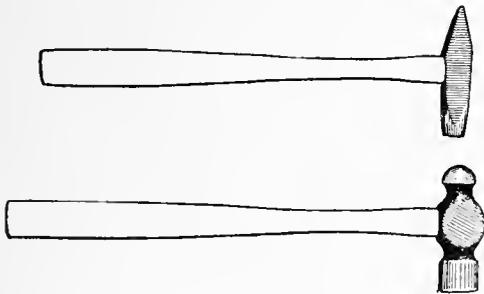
Riveting hammers: A, ordinary riveting hammer, B, machinist's hammer.
